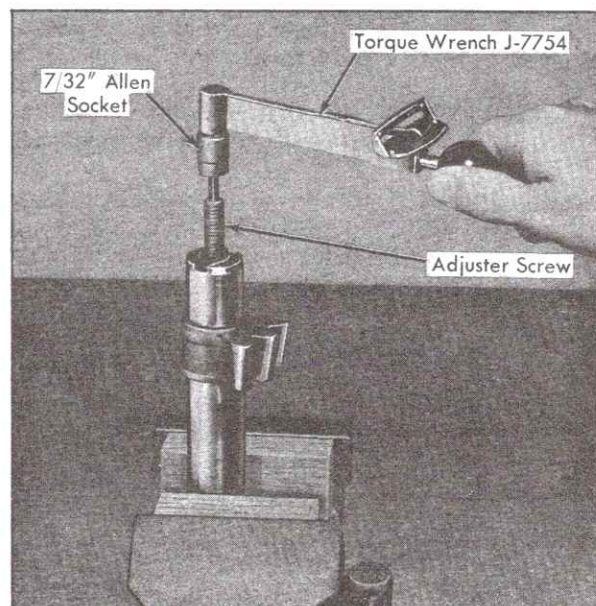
Checking Pitman Shaft Adjuster Screw
